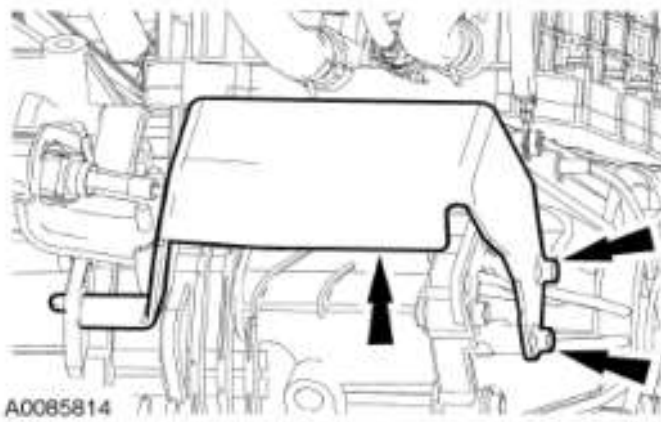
Locating Transaxle Control Snow Shield And Bolts
